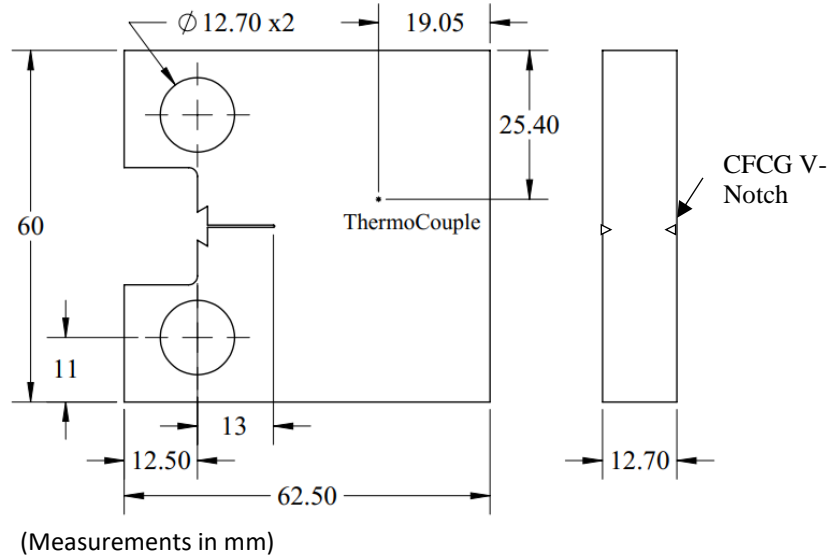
Compact tension C(T) specimen dimensions according to ASTM E-647
